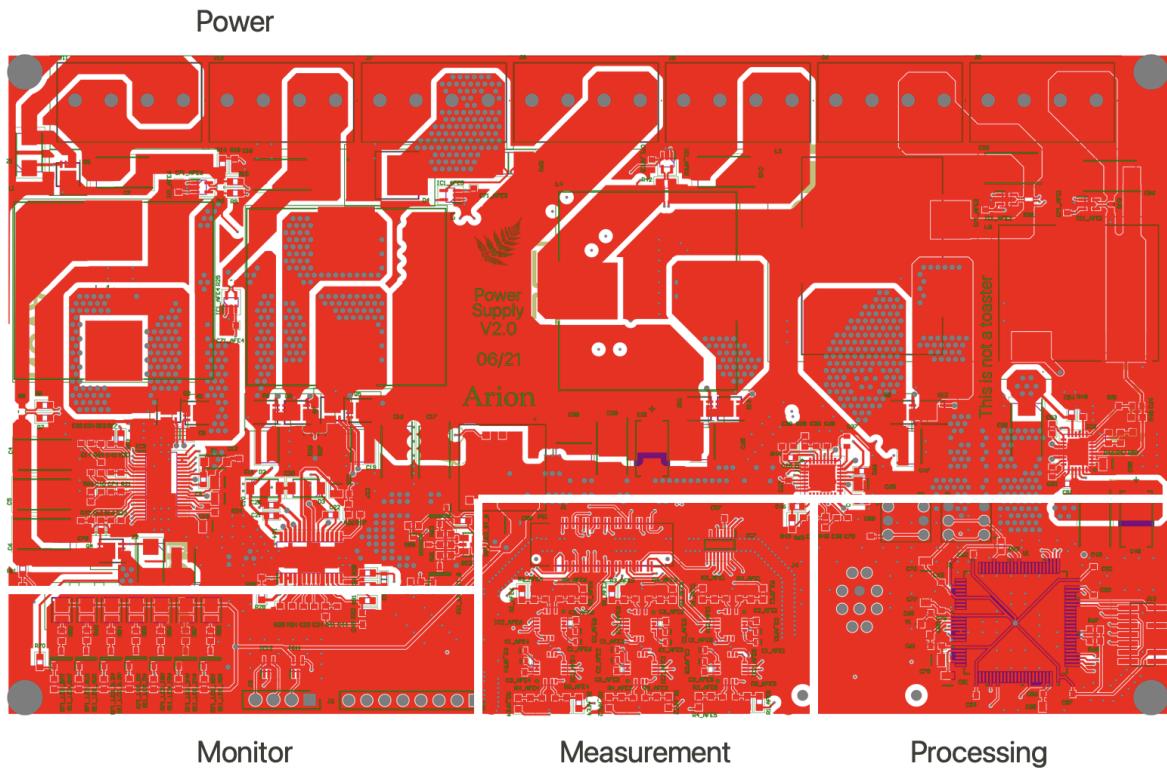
Power layer 1 (PL1) of the final PCB design (PowerModule.PcbDoc)
